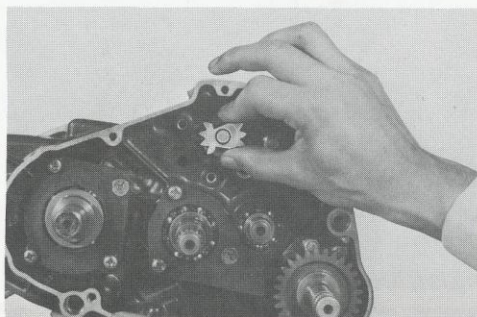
Remove gearshifting cam driven gear, taking care not to allow the pin and spring to fly off.
